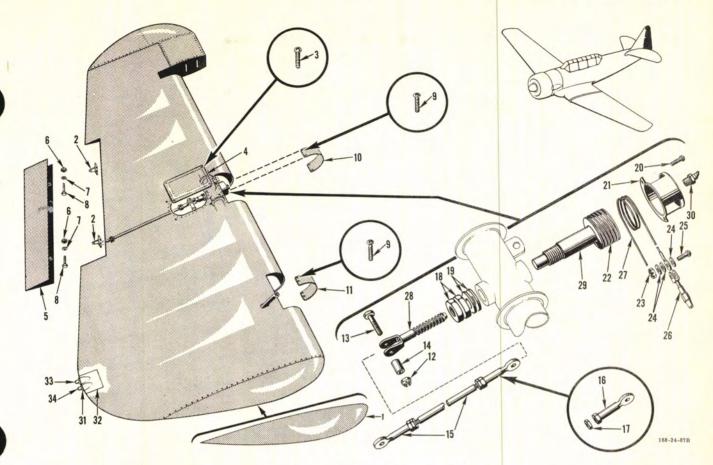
COVERED	RUDDER	ASSEMBLY
